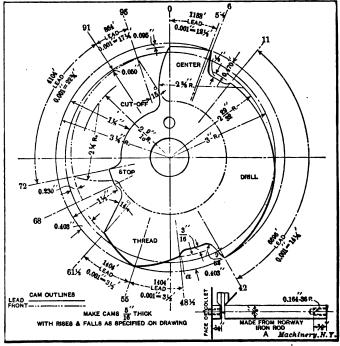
Example of Design of Thread Lobe when using Belt Shifting Attachment
